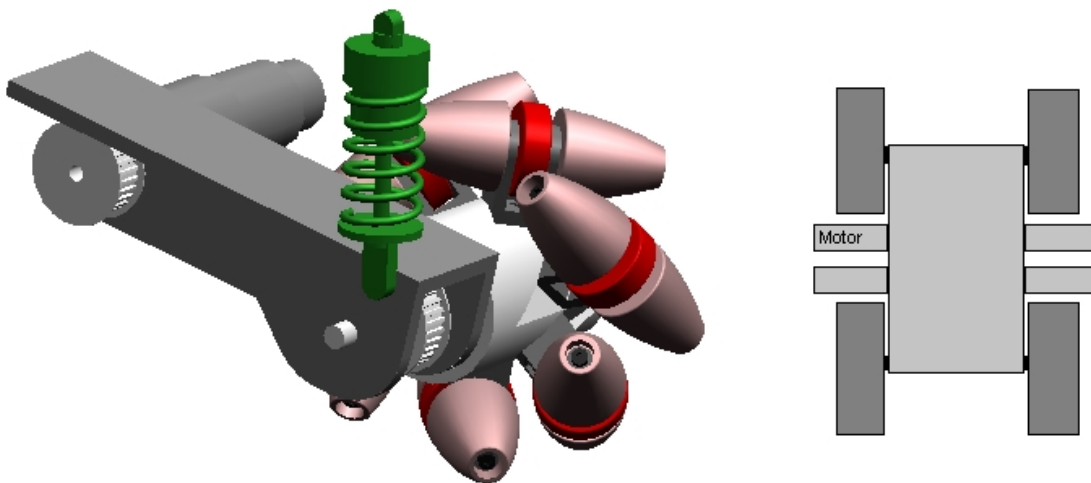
Early design concept using miniature toothed belt to transmit drive to wheels
